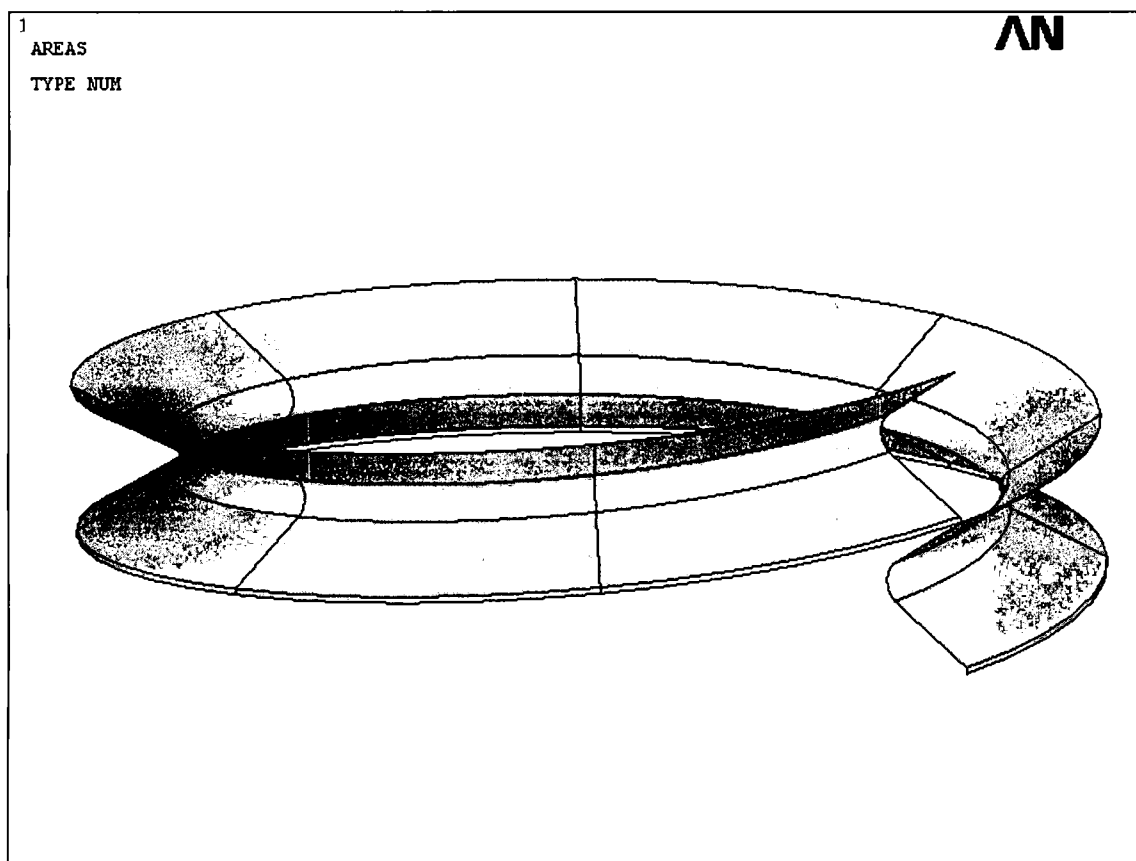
ANSYS surface image of the 1st thread of the bolt.
